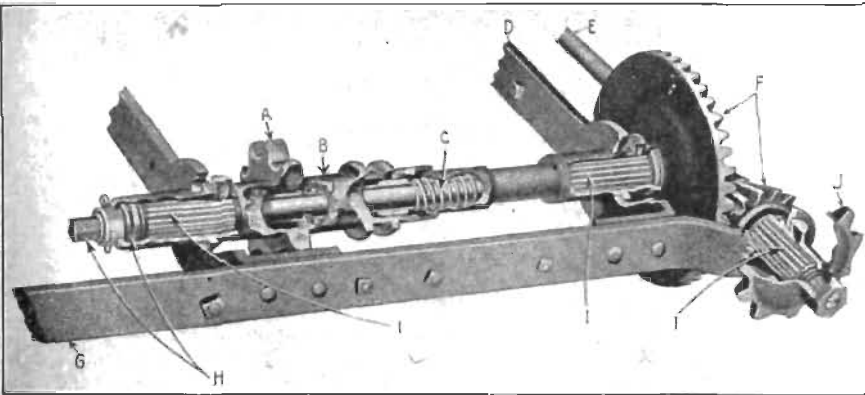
Binder countershaft and crank shaft: A, drive sprocket; B, clutch; C, clutch spring; D, frame; E, crank shaft; F, bevel gears; G, frame; H, adjustable end-thrust ball bearing to keep gear and crank-shaft pinion always in mesh and to take up wear; I, roller bearings; J, drive sprocket for platform, elevators, and binder attachments.
